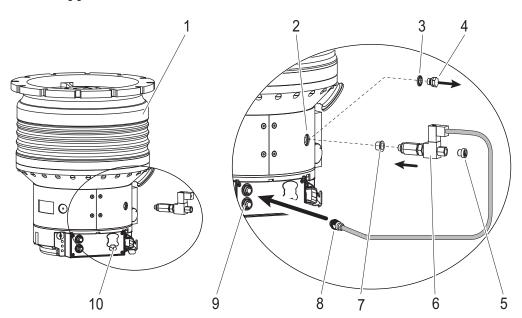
Example: Connecting M12 sealing gas valve to TC 1200, TCP 1200 electronic drive units
